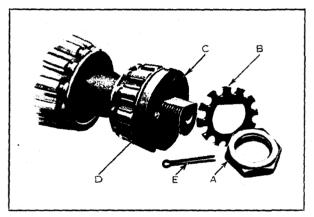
Front Wheel Bearings and Adjusting Nuts
